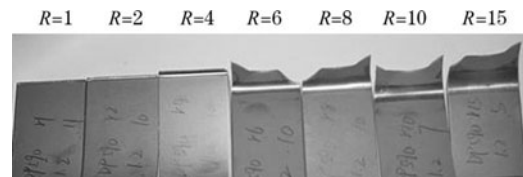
Fracture modes and location of DP590 steel over different die radii ($t = 1.2$ mm)
